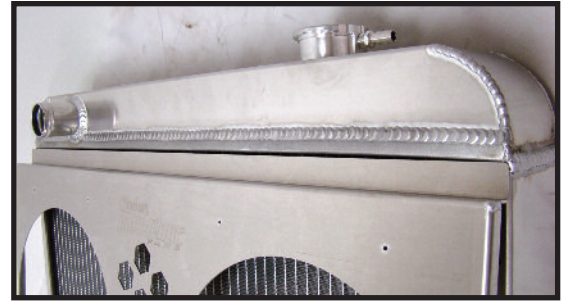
Top of shroud marking mounting position on radiator.
